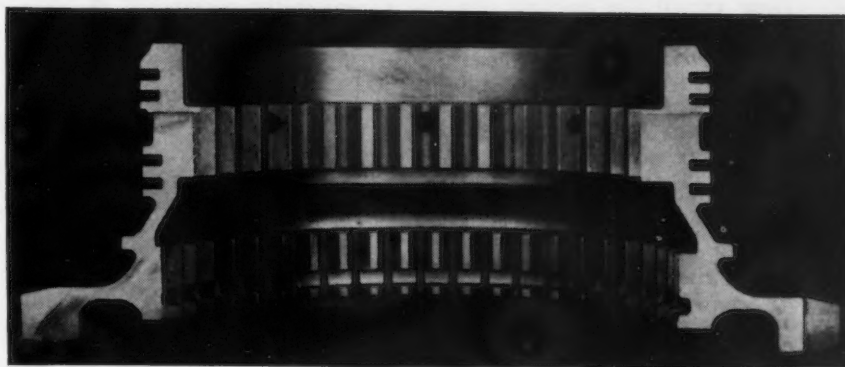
Section through gear with splines. Such a gear is most difficult to heat treat and finish satisfactorily.
